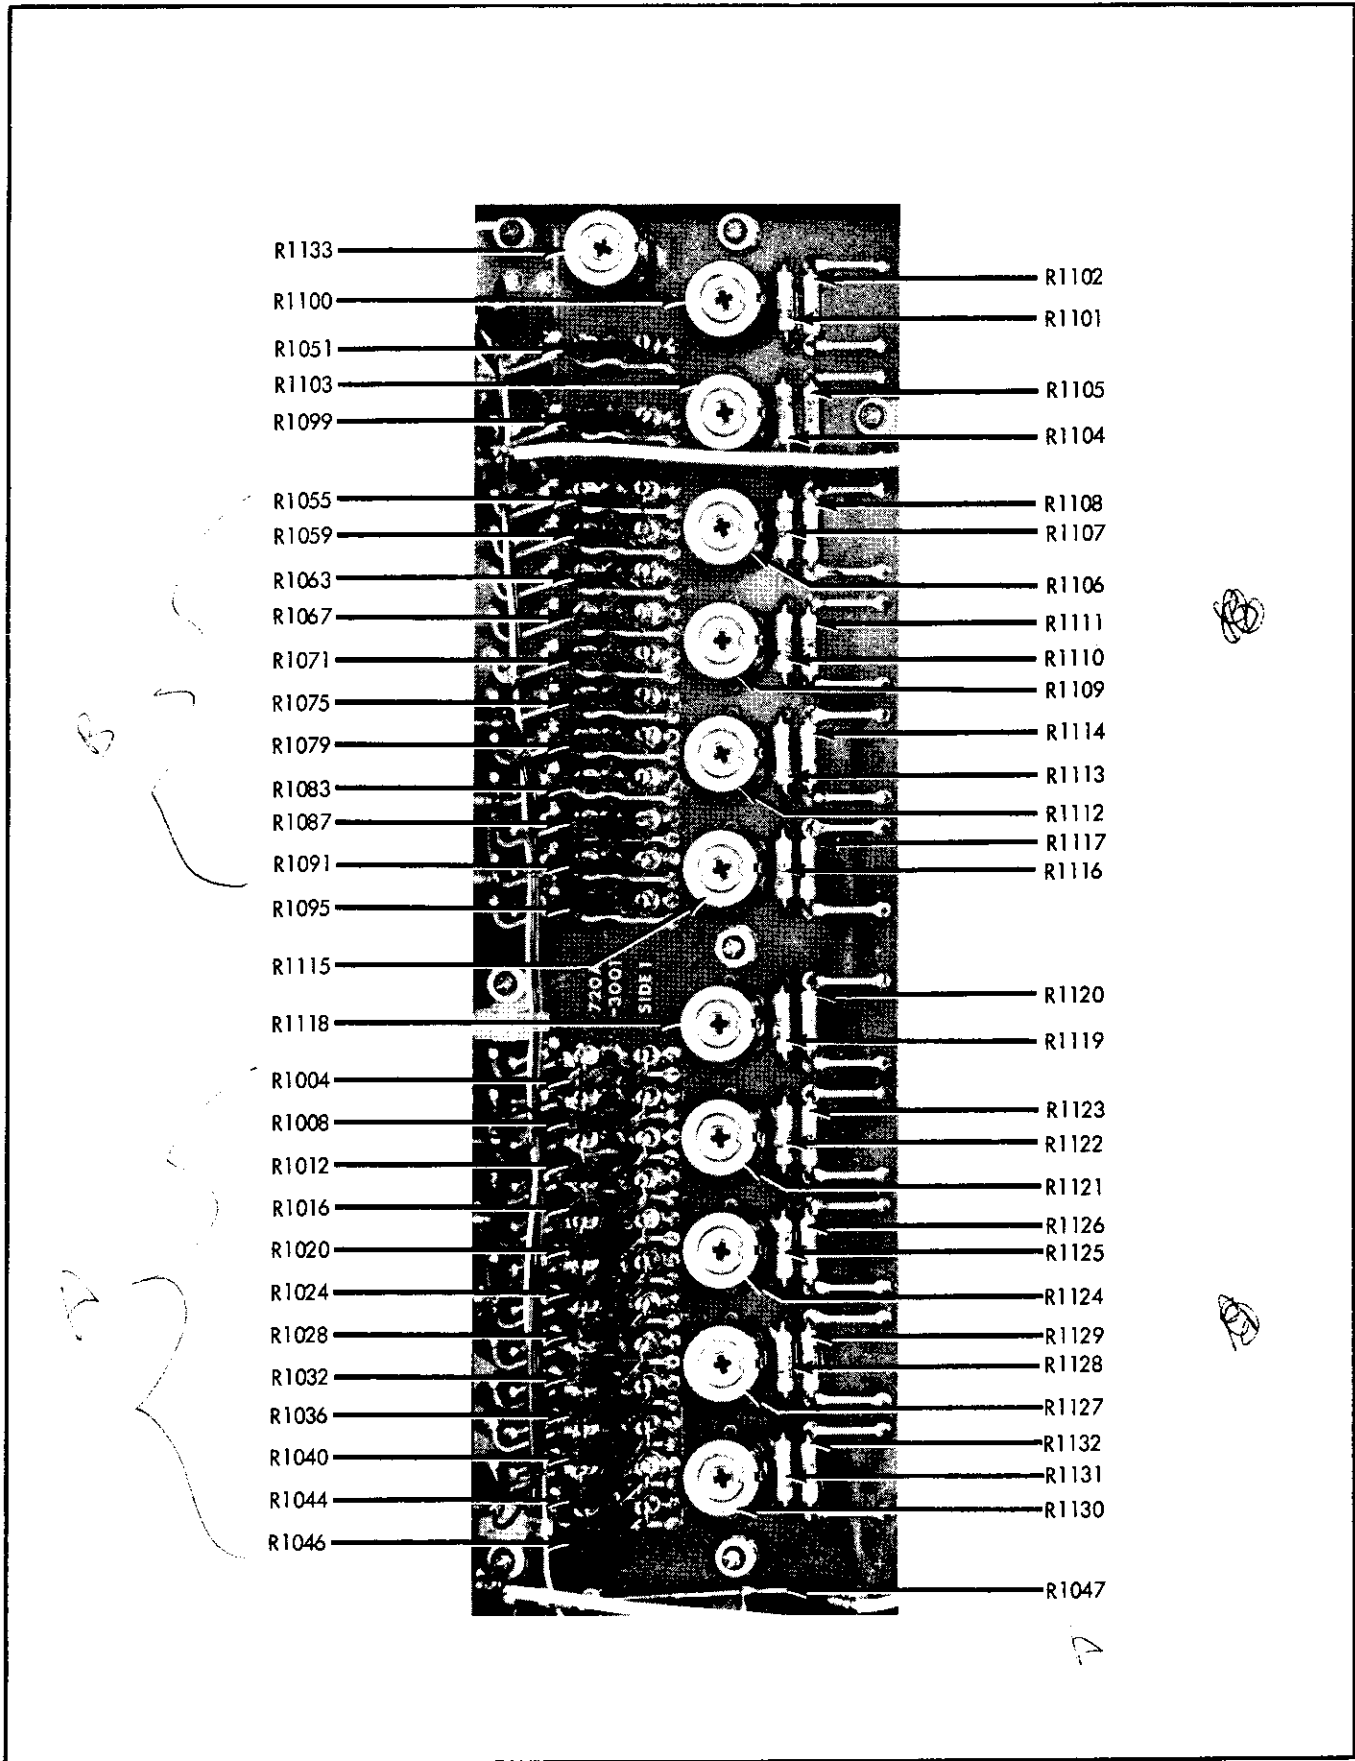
TRIMMER P/C ASSEMBLY (Sheet 1 of 2)
